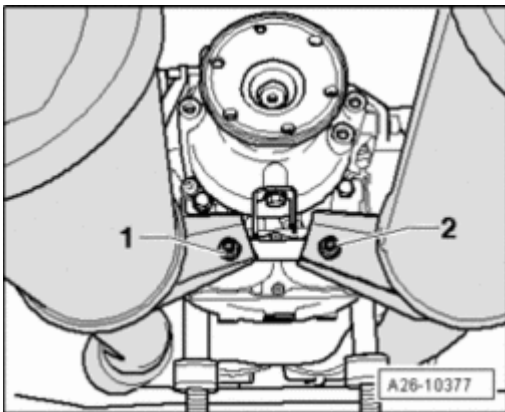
Removing Bolt On Bracket For Exhaust System And Catalytic Converter With Front Muffler
